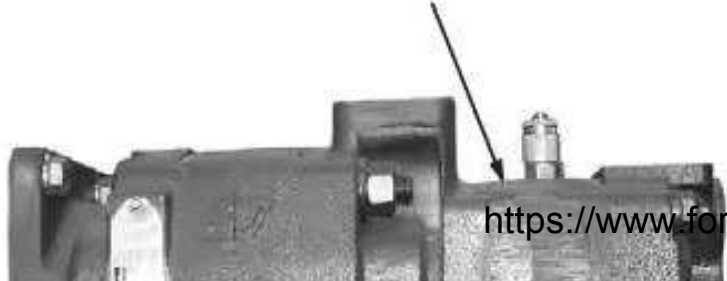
Valve Bank Through Bolts (Accessory Side)
